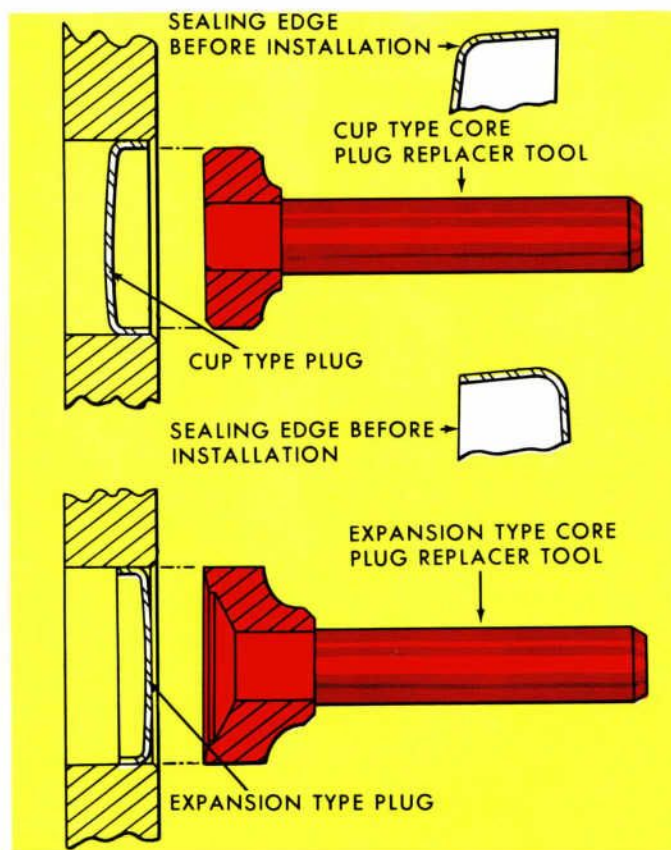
TYPICAL CORE PLUGS AND INSTALLATION TOOLS
